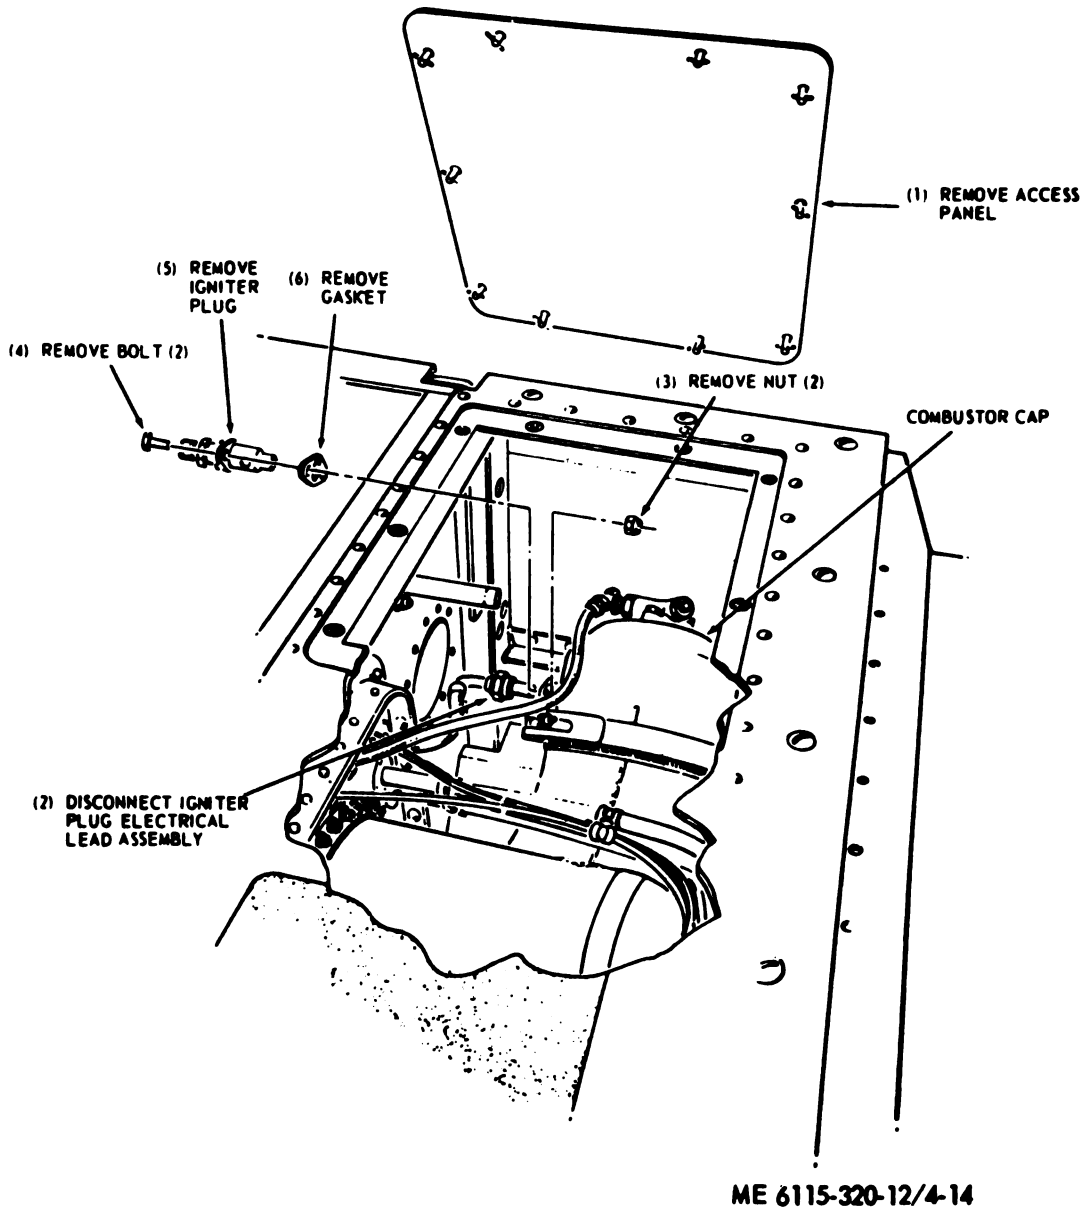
Igniter plug, and igniter plug electrical lead assembly, removal and installation.
